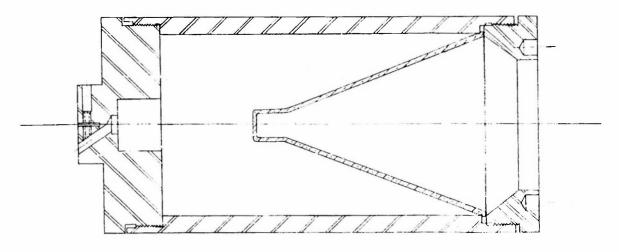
DRC376 Penetration Test Assembly. DRB378 Cone.
